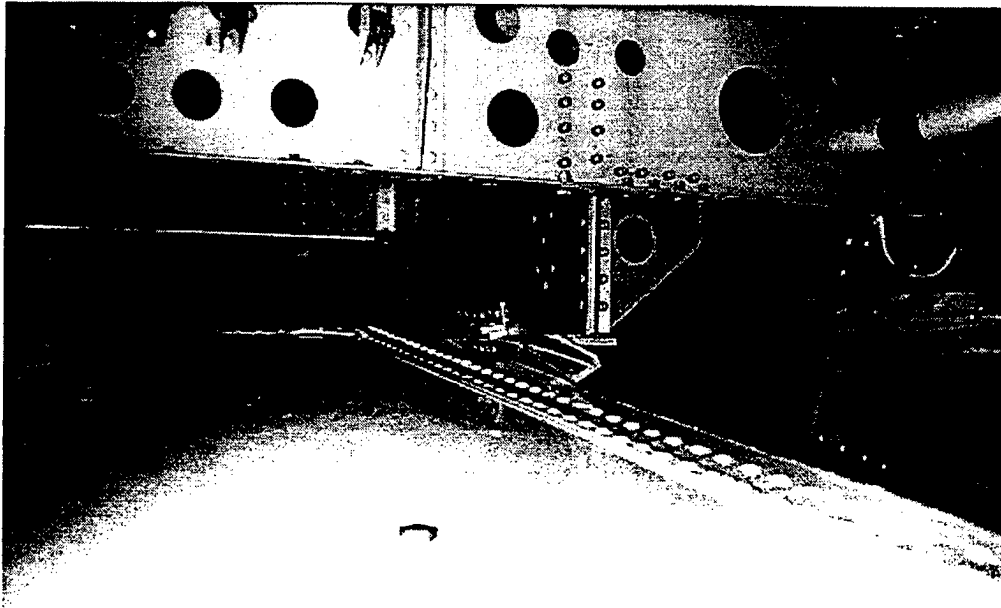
POSTTEST AUXILIARY FUEL TANK LEFT ATTACHMENT
